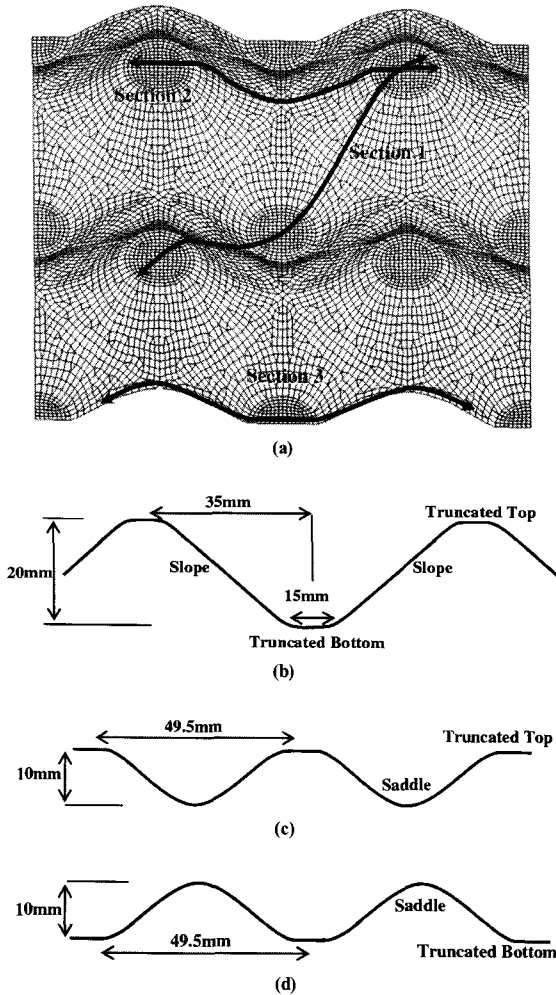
Geometry and sectional dimensions of the egg-box panel: (a) Local view, (b) section 1, (c) section 2, and (d) section 3.
